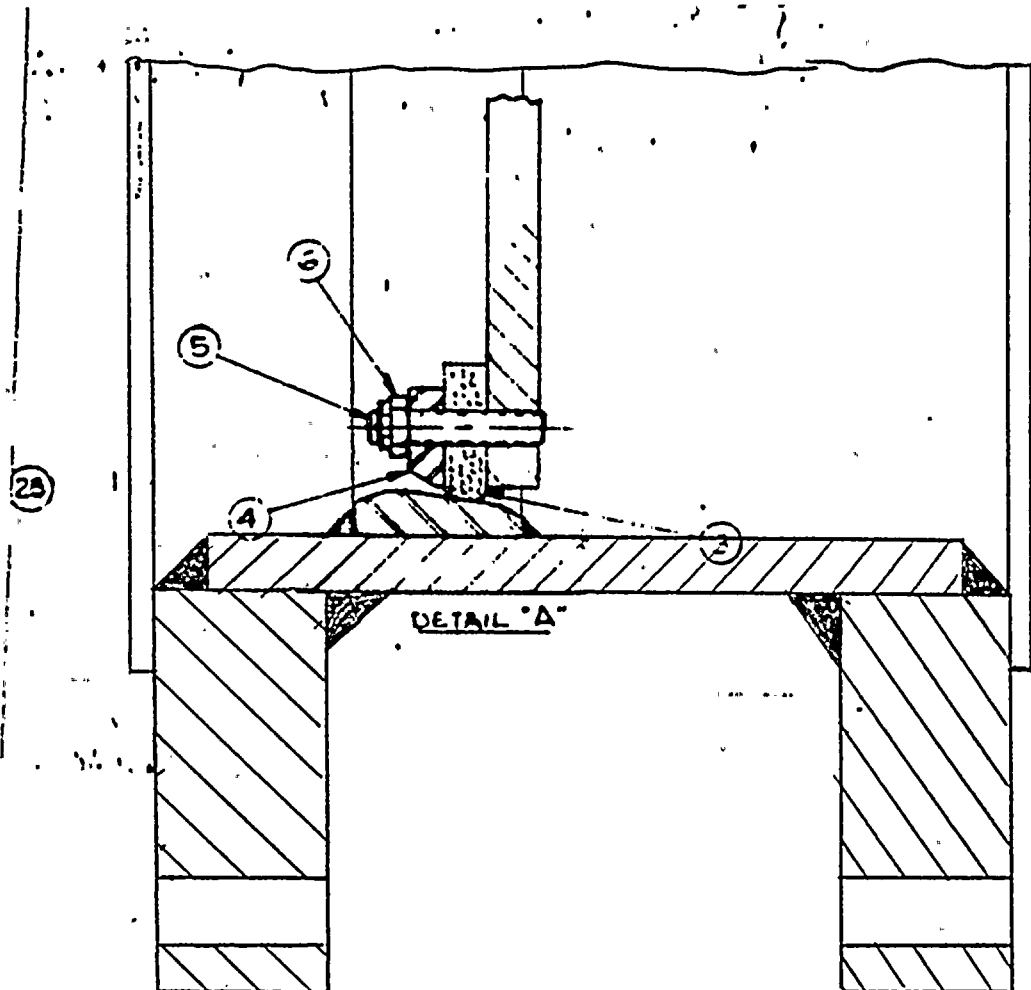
BIF DRAWING 206767, DETAIL A
